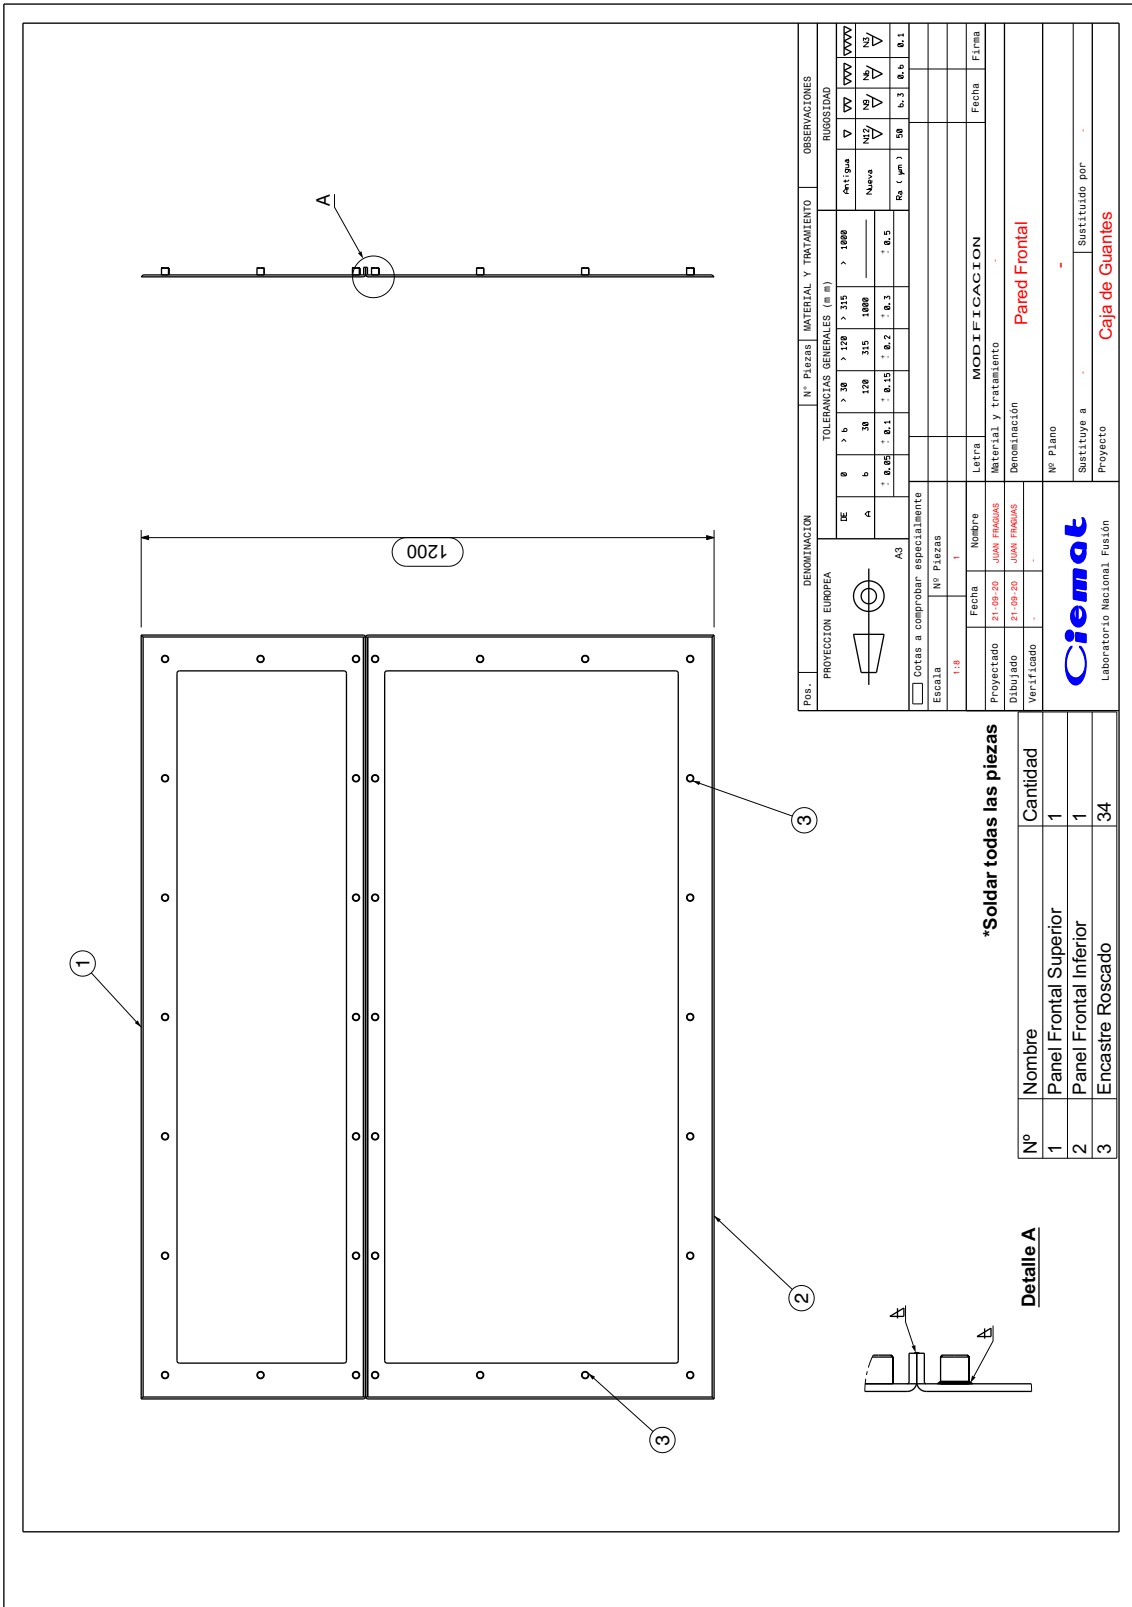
Welded lower and upper front panels of the glove box.
